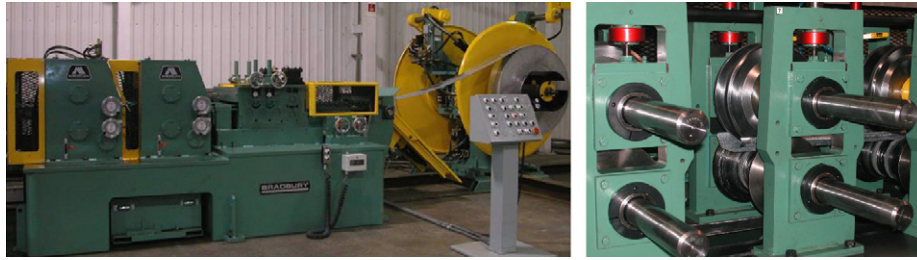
Cold-formed steel roll-forming: (left) sheet coil enters roll-forming line, (right) steel sheet is cold-formed into C-shape cross-section (photos courtesy of Bradbury Group).
